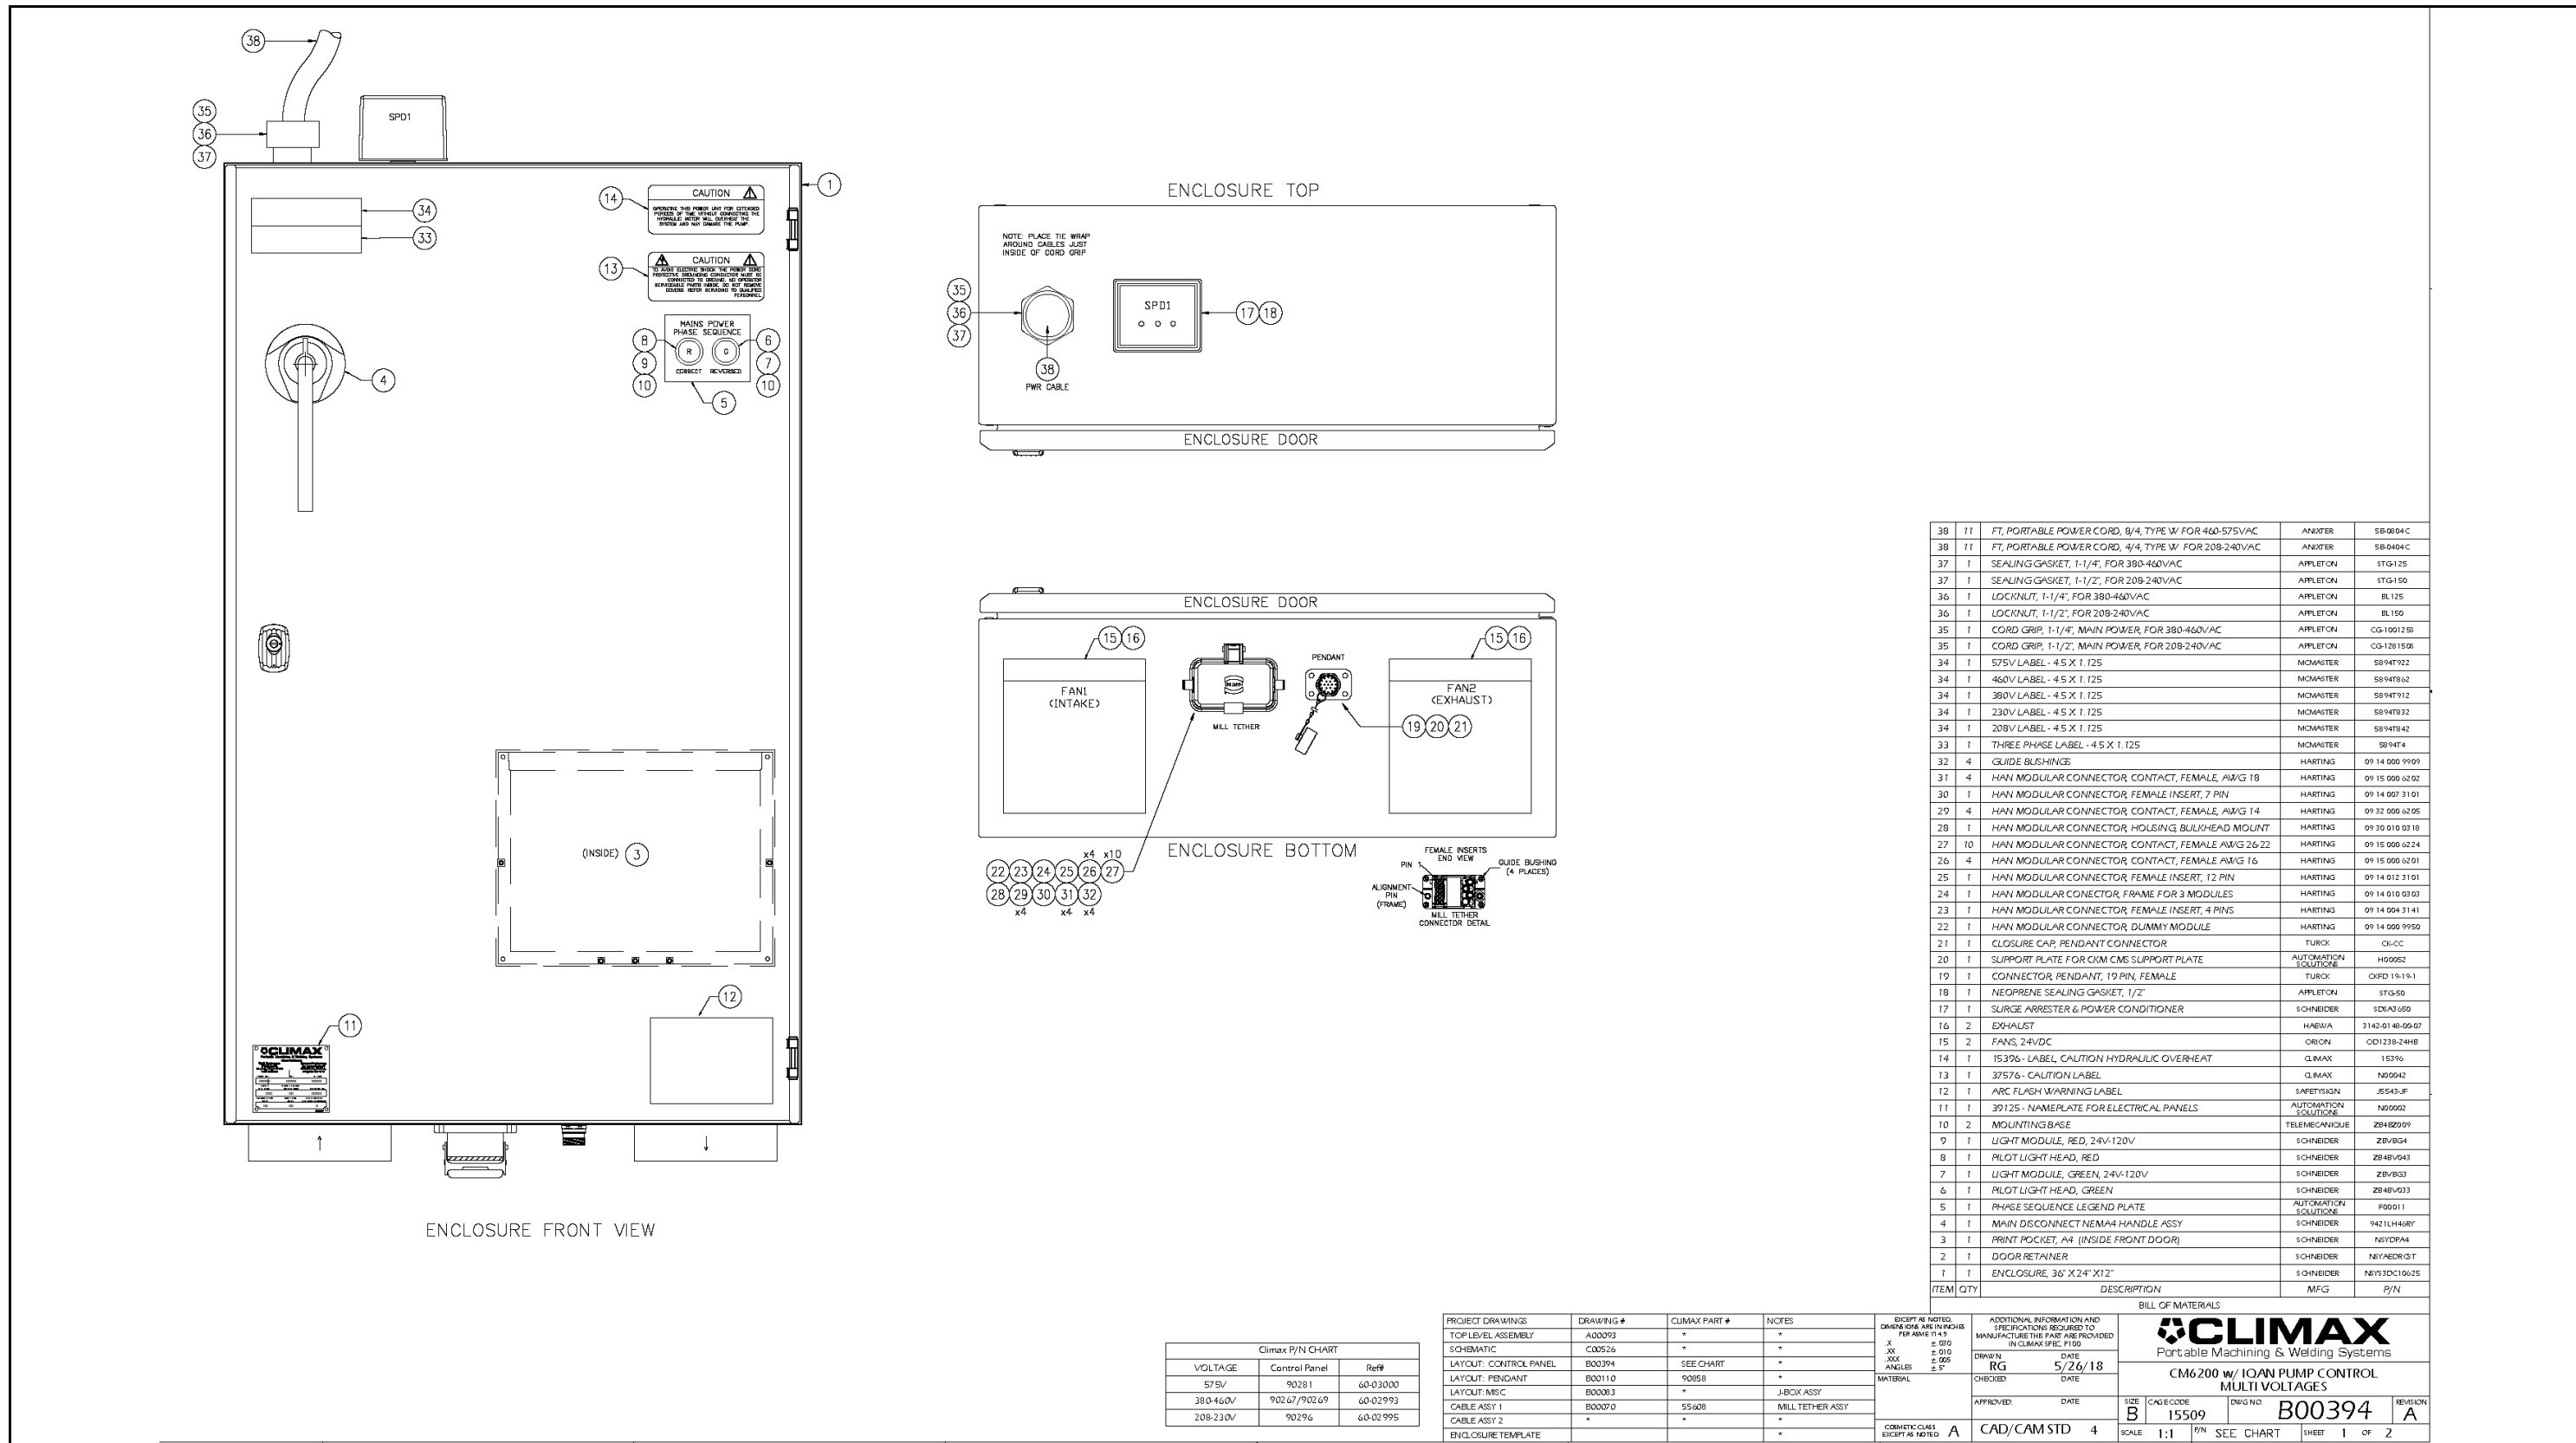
MR-J4 CONTROL PANEL ASSEMBLY EXTERIOR (P/N B000394)
